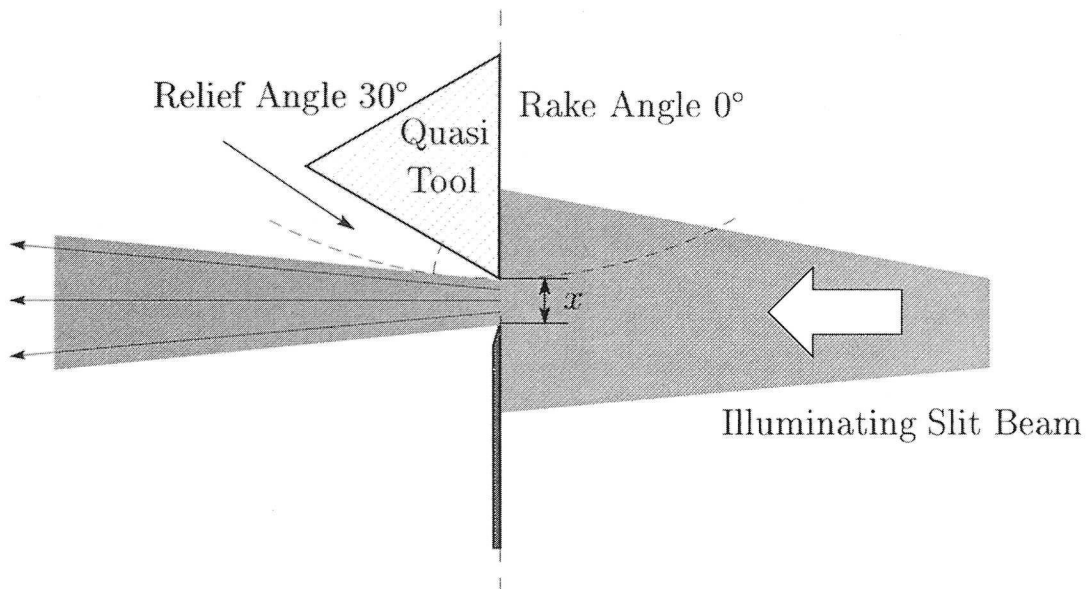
Illustration of the top view section on illuminated position to a quasi tool cutting edge.
